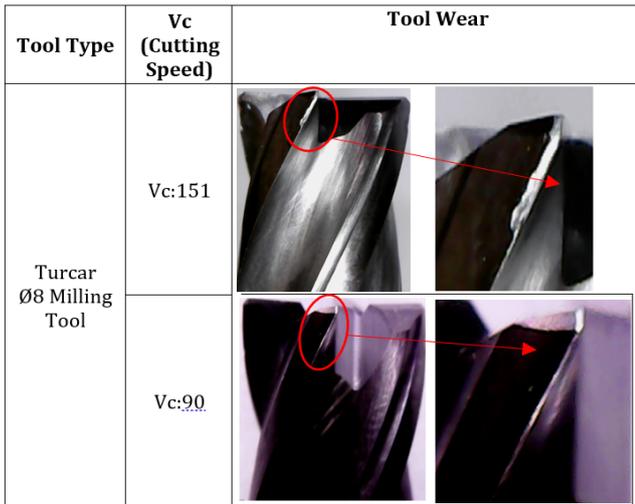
Tool wear for 45min. machining of Ø8 Turcar
